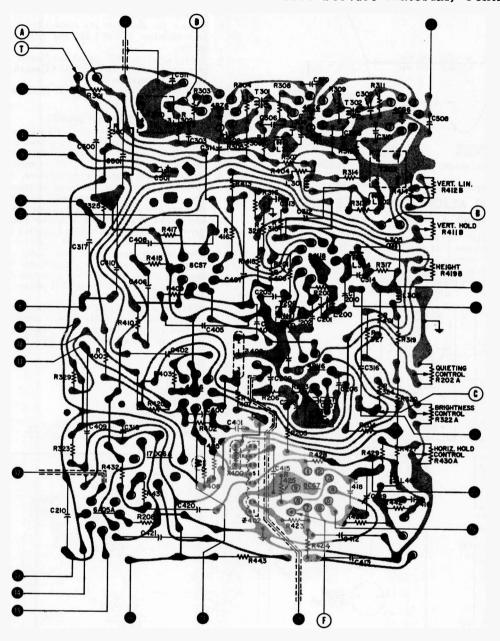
Bottom View of Printed Board Showing Top Components as Schematic Symbols
